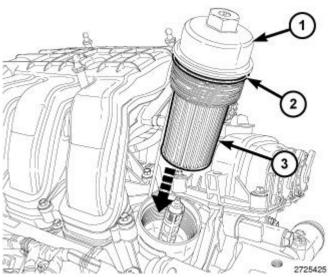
O-Ring Seal, Oil Filter Cap & Oil Filter Courtesy of CHRYSLER GROUP, LLC
